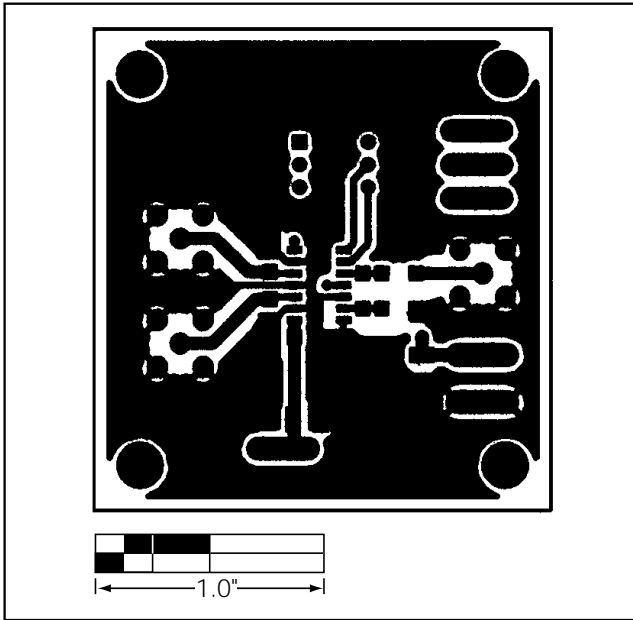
MAX4159 EV Kit PC Board Layout—Component Side
